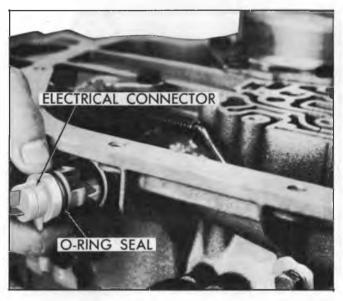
T-Installing Electrical Connector and "O" Ring Seal
